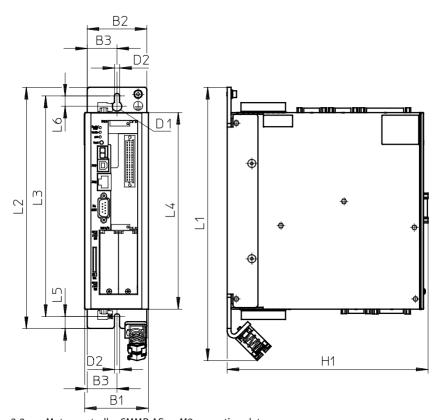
Motor controller CMMP-AS-...-M3: mounting plate
